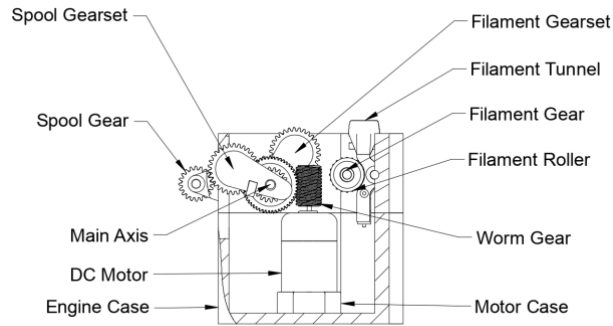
The FUME Engine. Cross-sectional cut is marked with diagonal lines, allowing to see the gears within the engine case.
